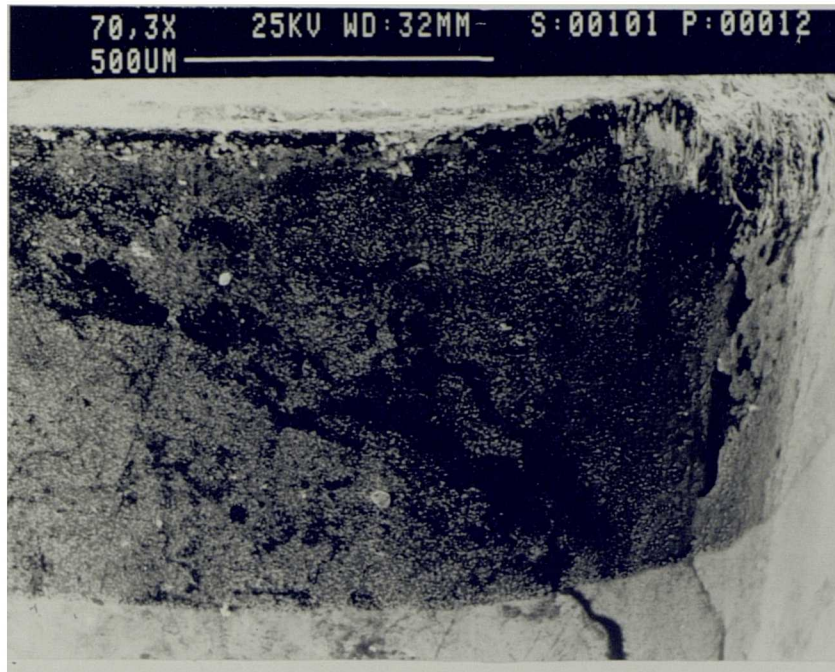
Development of cracks on the flank face of brazed WC material.
